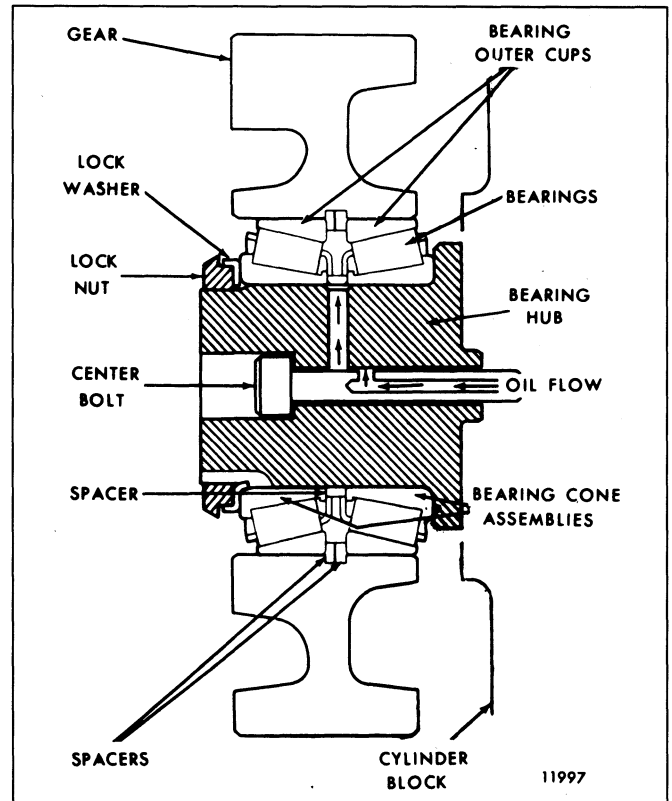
Camshaft Idler Gear and Crankshaft Rear Idler Gear Mounting
